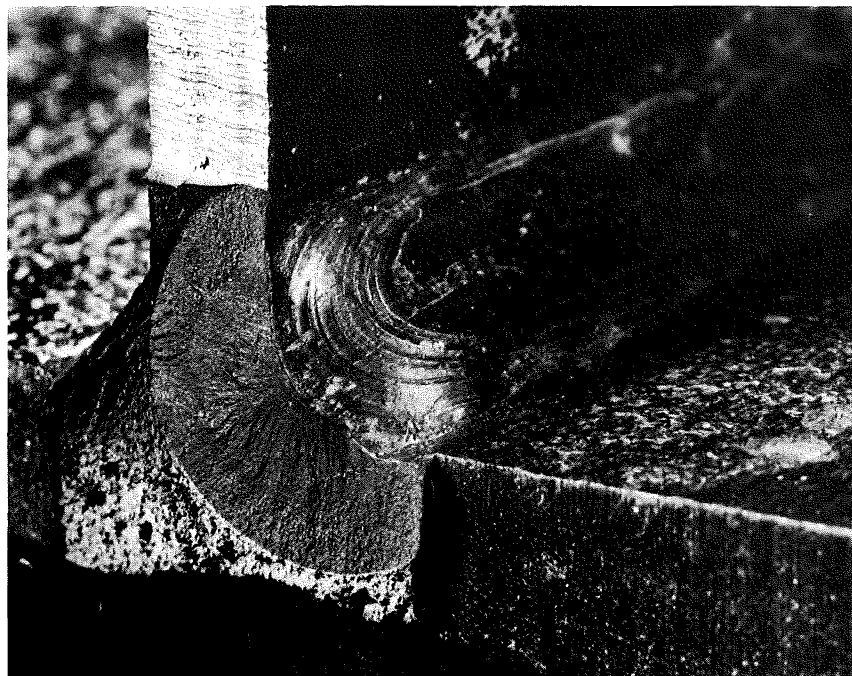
Initiation of a crack at the start of a weld repair placed to fill insufficient weld profile ($\sim x2.5$)
